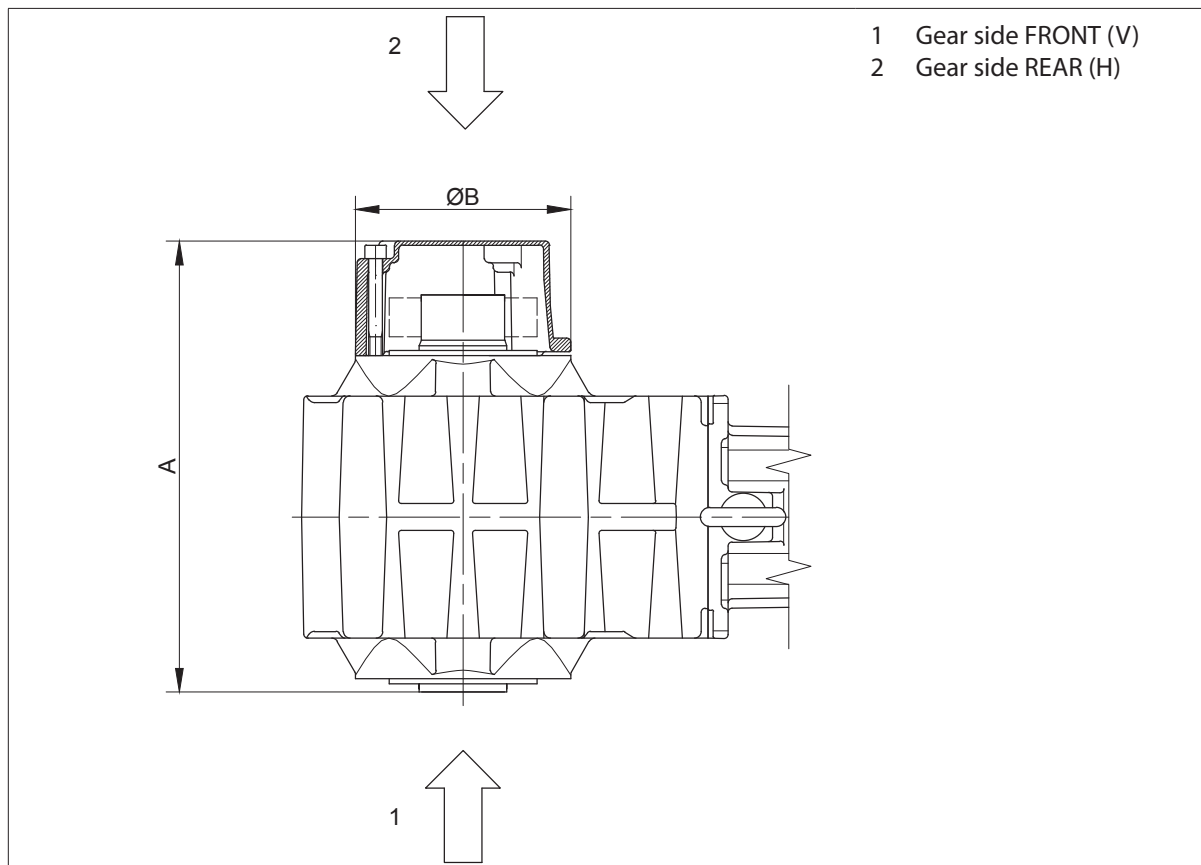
SSV cover for bevel gearbox BK10 ... BK90
